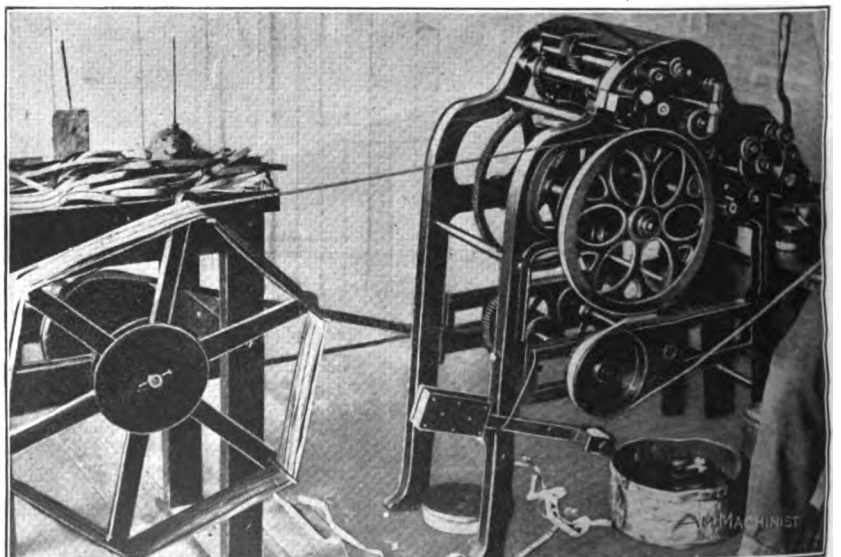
AUTOMATIC TAPE-PRINTING MACHINE
